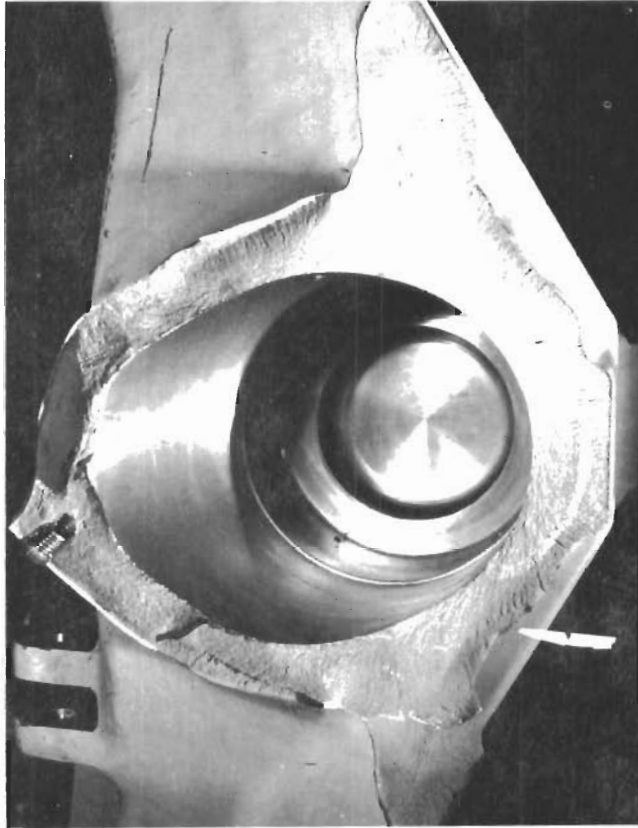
Fracture Face - Stress Corrosion Cracking Aluminum Alloys (7079-T6)
